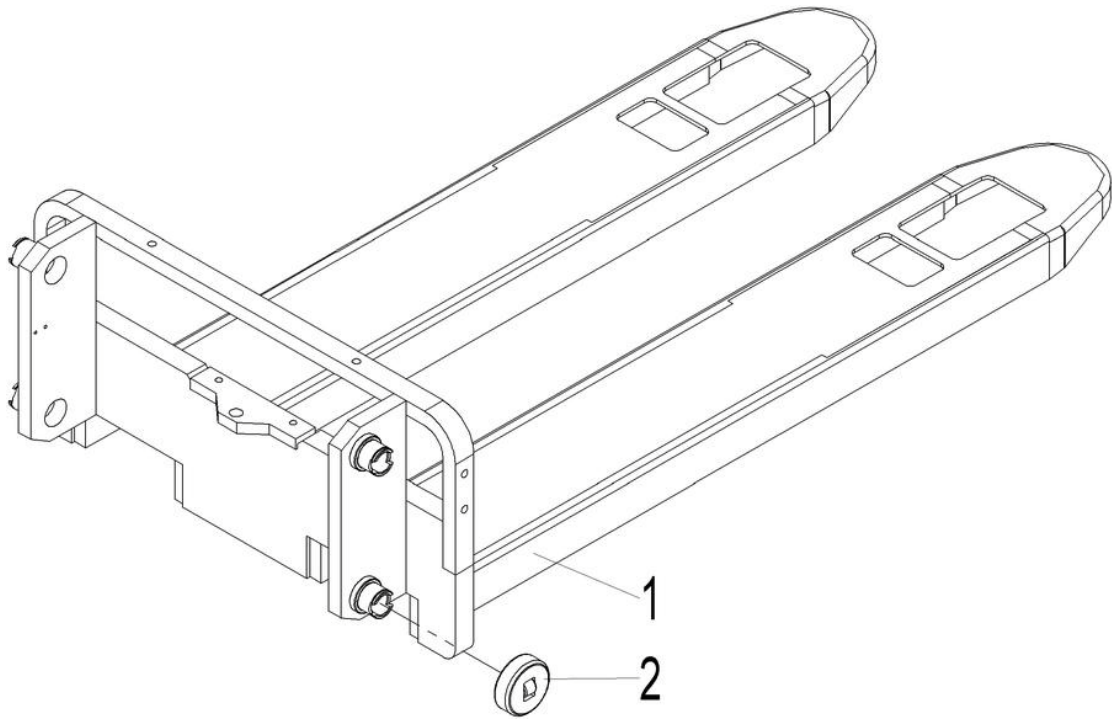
Pallet Frame Assembly PT20D (1600/2000)
